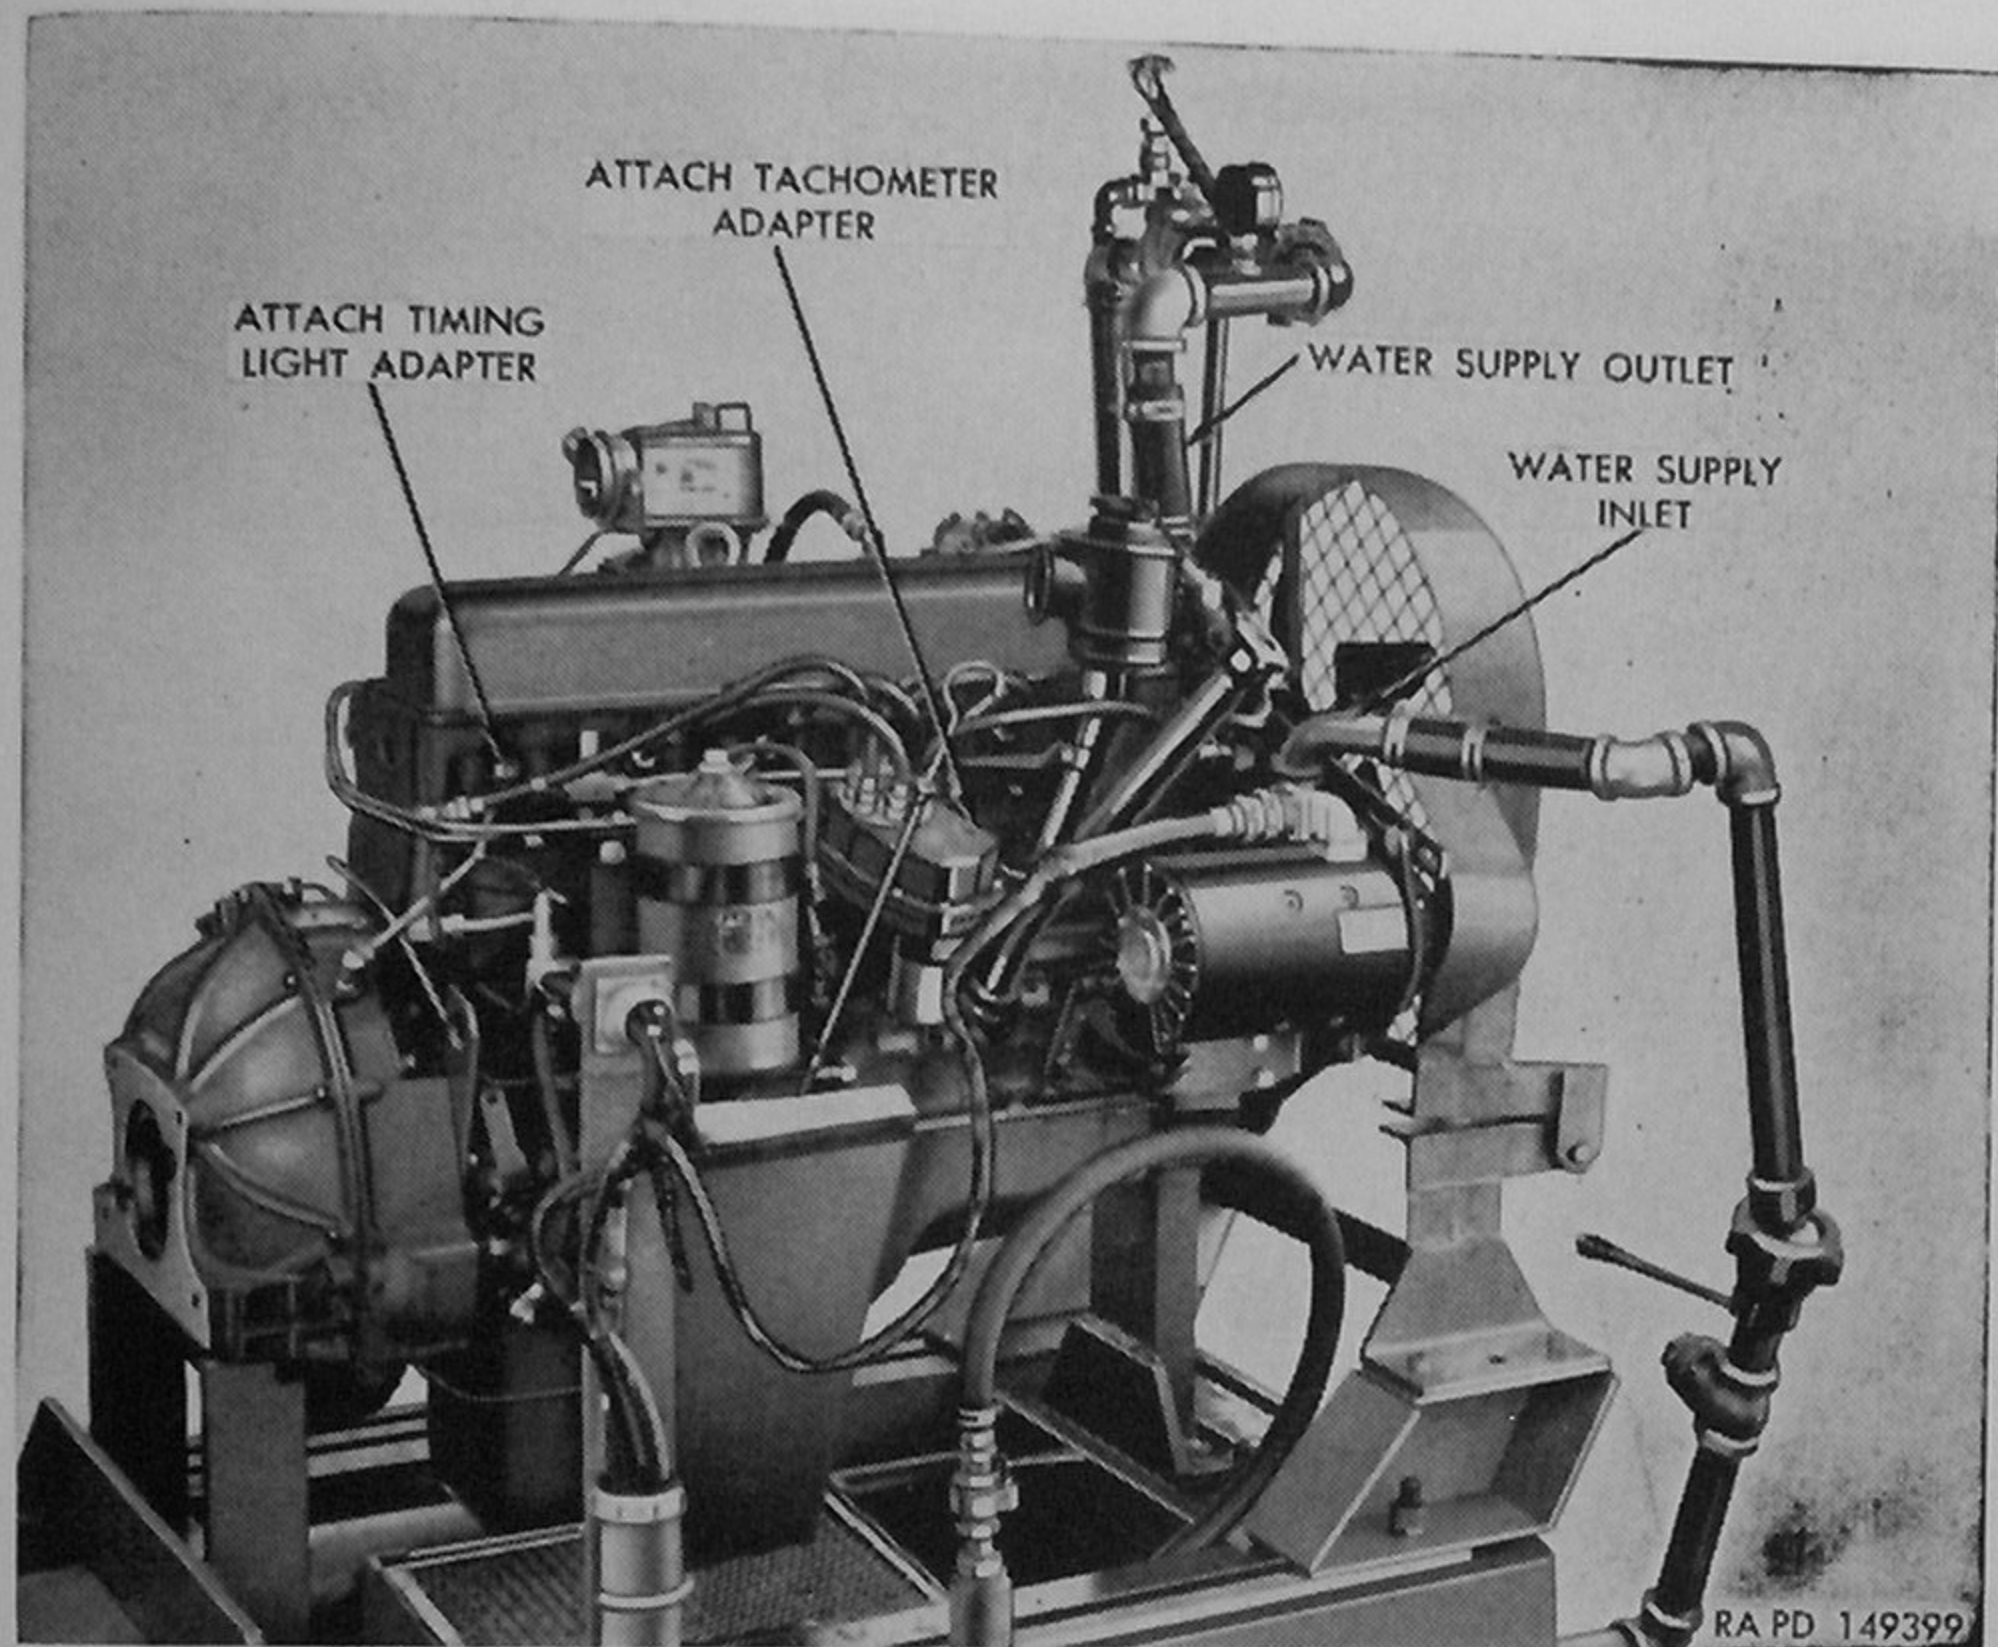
Engine assembly 7411599 in typical test stand (right side view).
